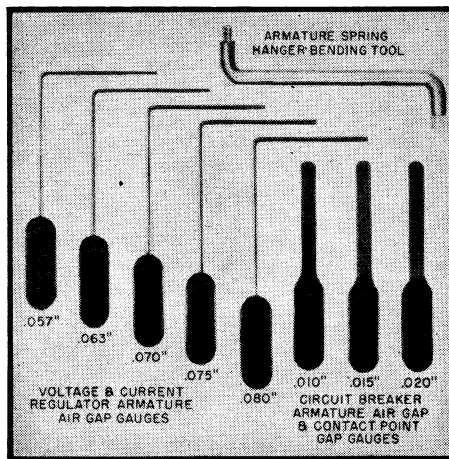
Tool kit for adjusting Delco-Remy regulators
